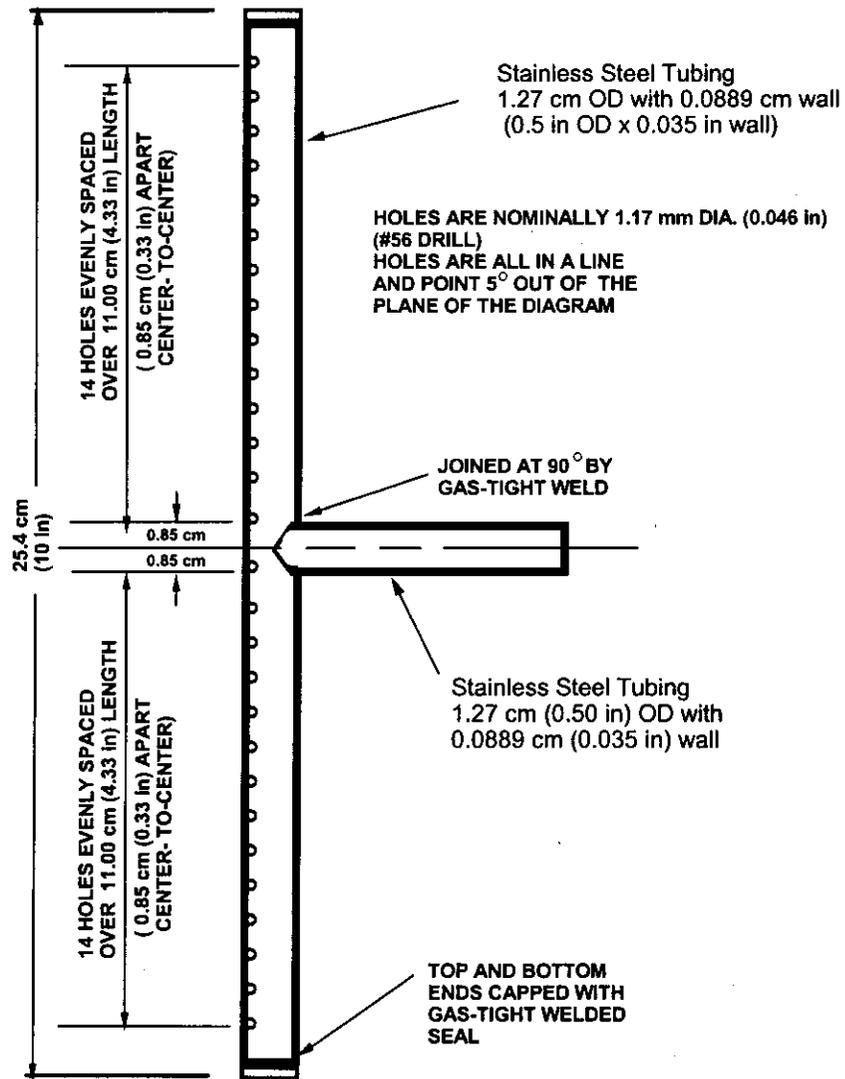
DETAILS OF VERTICAL BURNER HEAD.
